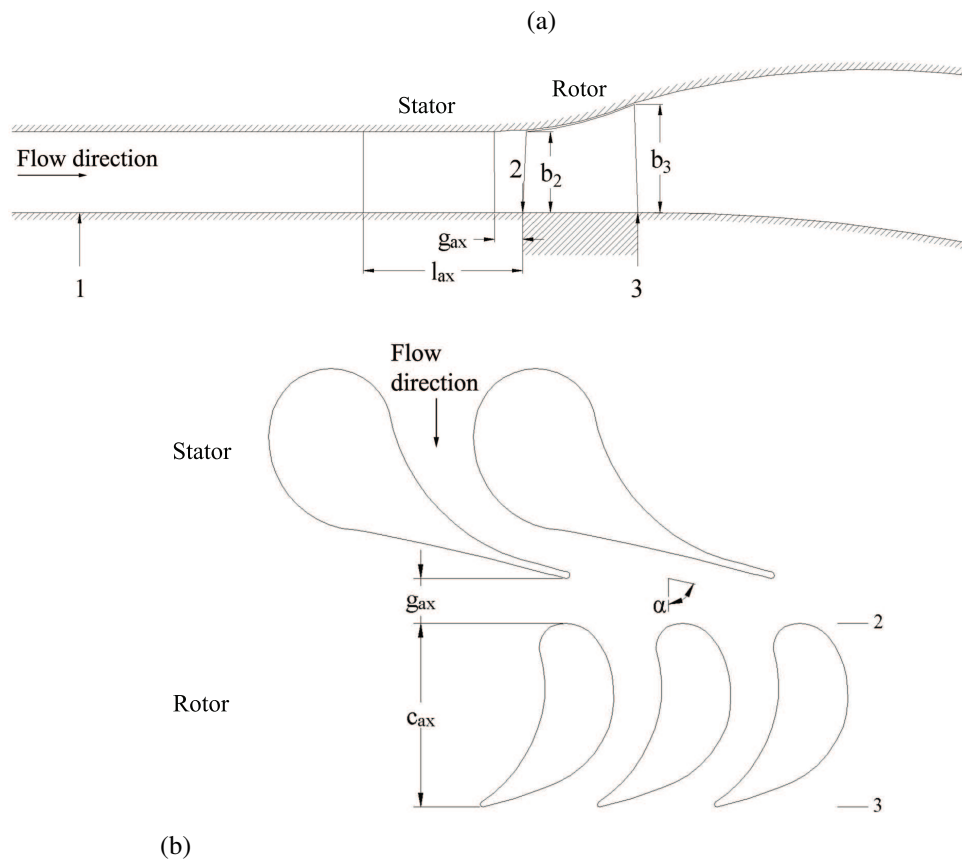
Definitions of the studied turbine geometry and measurement planes, (a) side view and (b) top view (hub).
